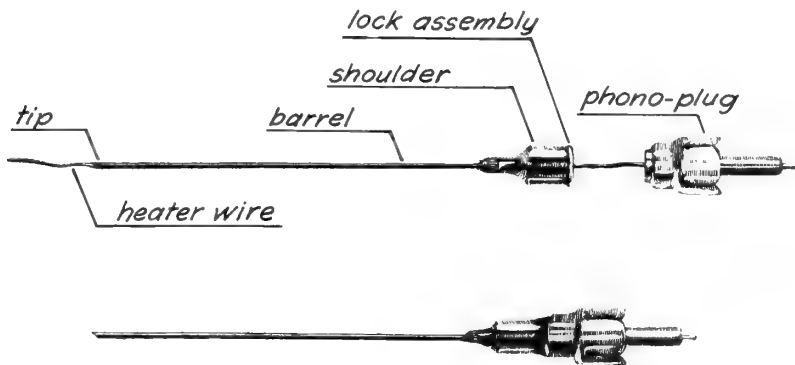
Heater probe assembly, blown-up illustration with finished probe below.
